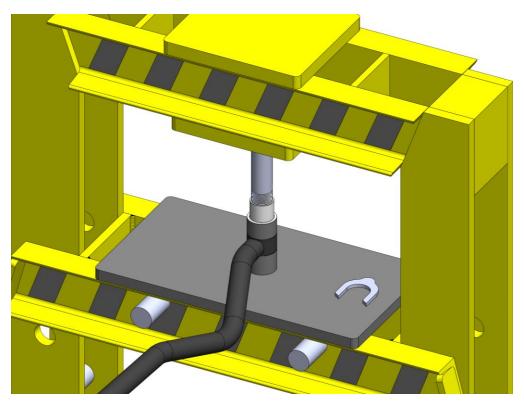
Sleeved end of the track bar with worn bushing pressed out and replaced
